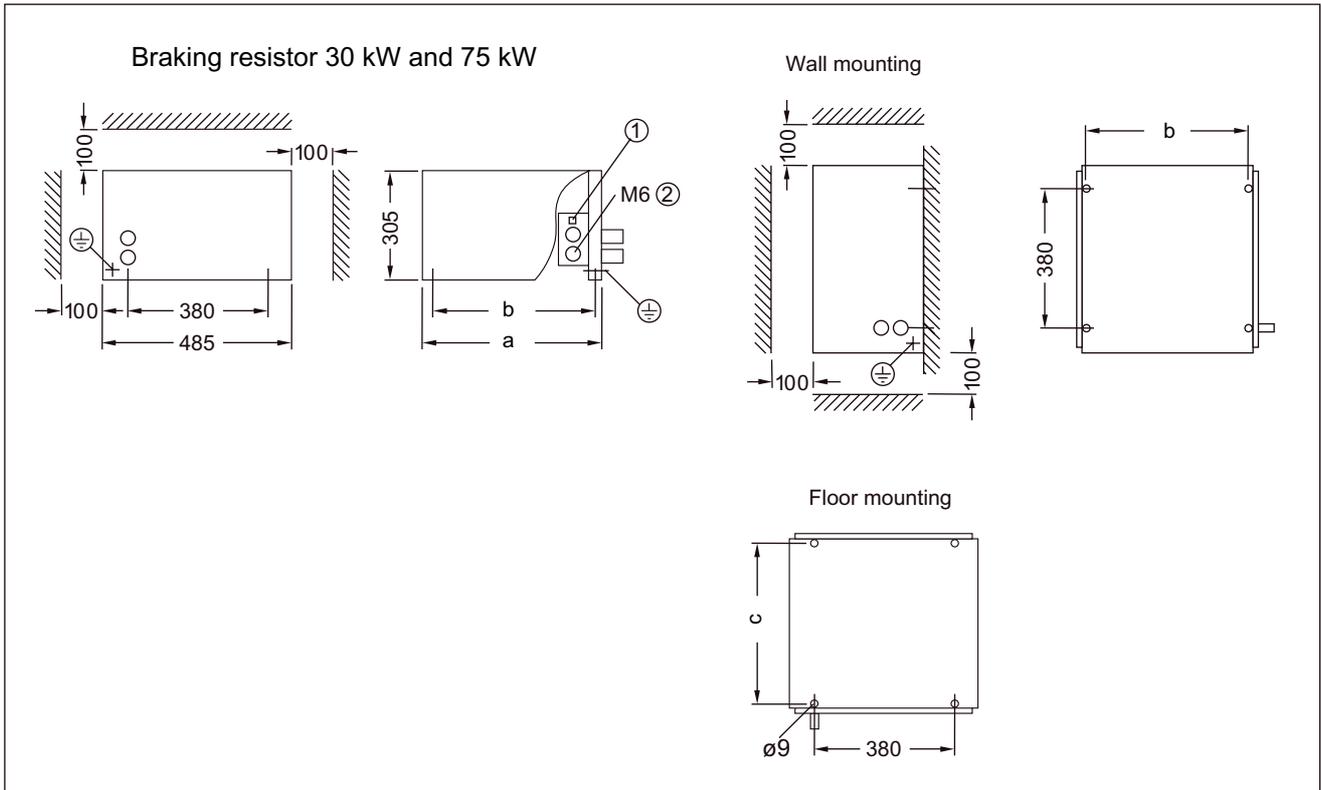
Dimension and installation drawing for braking resistor 30 kW and 75 kW, all dimensions in mm
